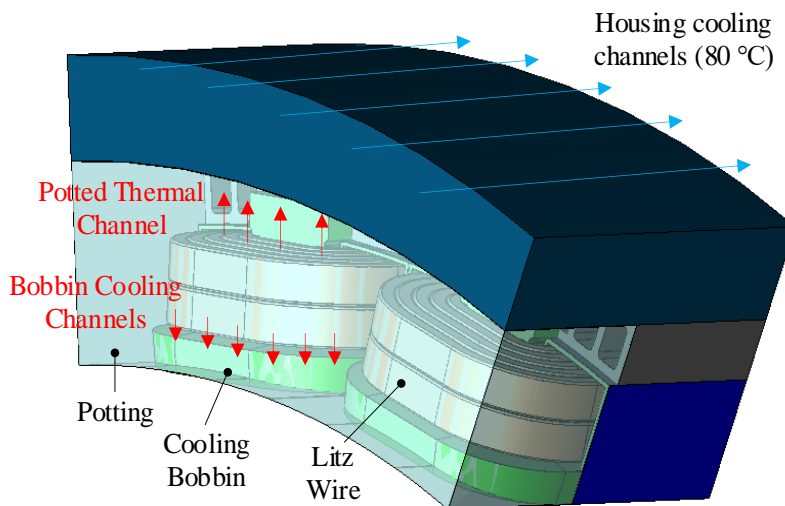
Stator cooling approach using housing channels and in-slot cooling channels in the winding bobbin.
